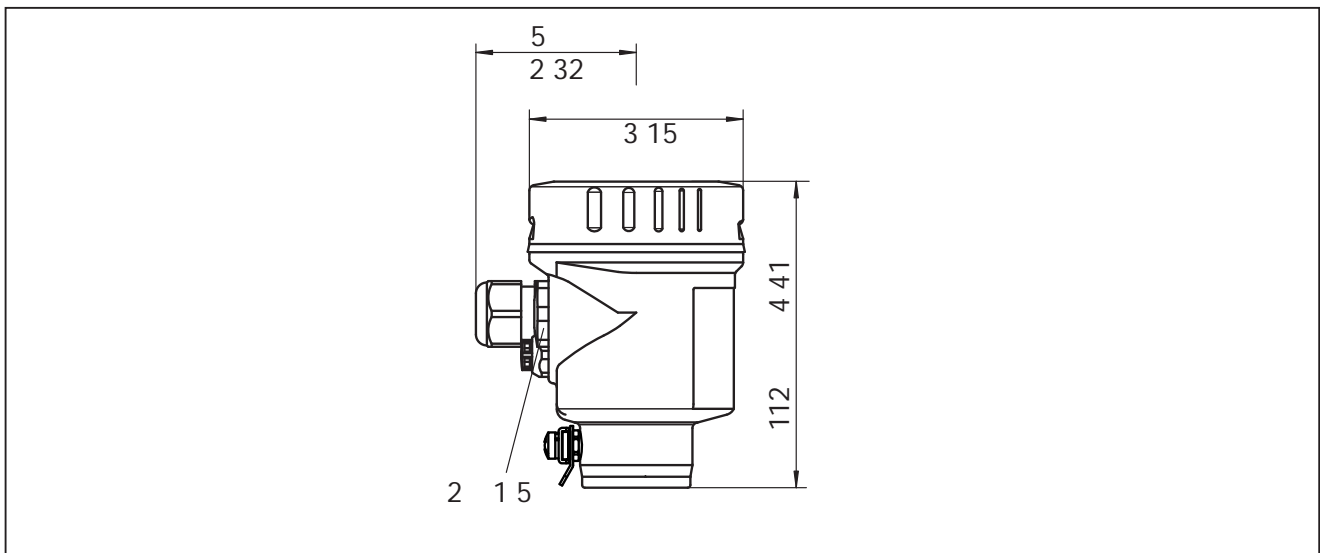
Stainless steel housing (electropolished) - with integrated display and adjustment module the housing is 9 mm/0.35 in higher
